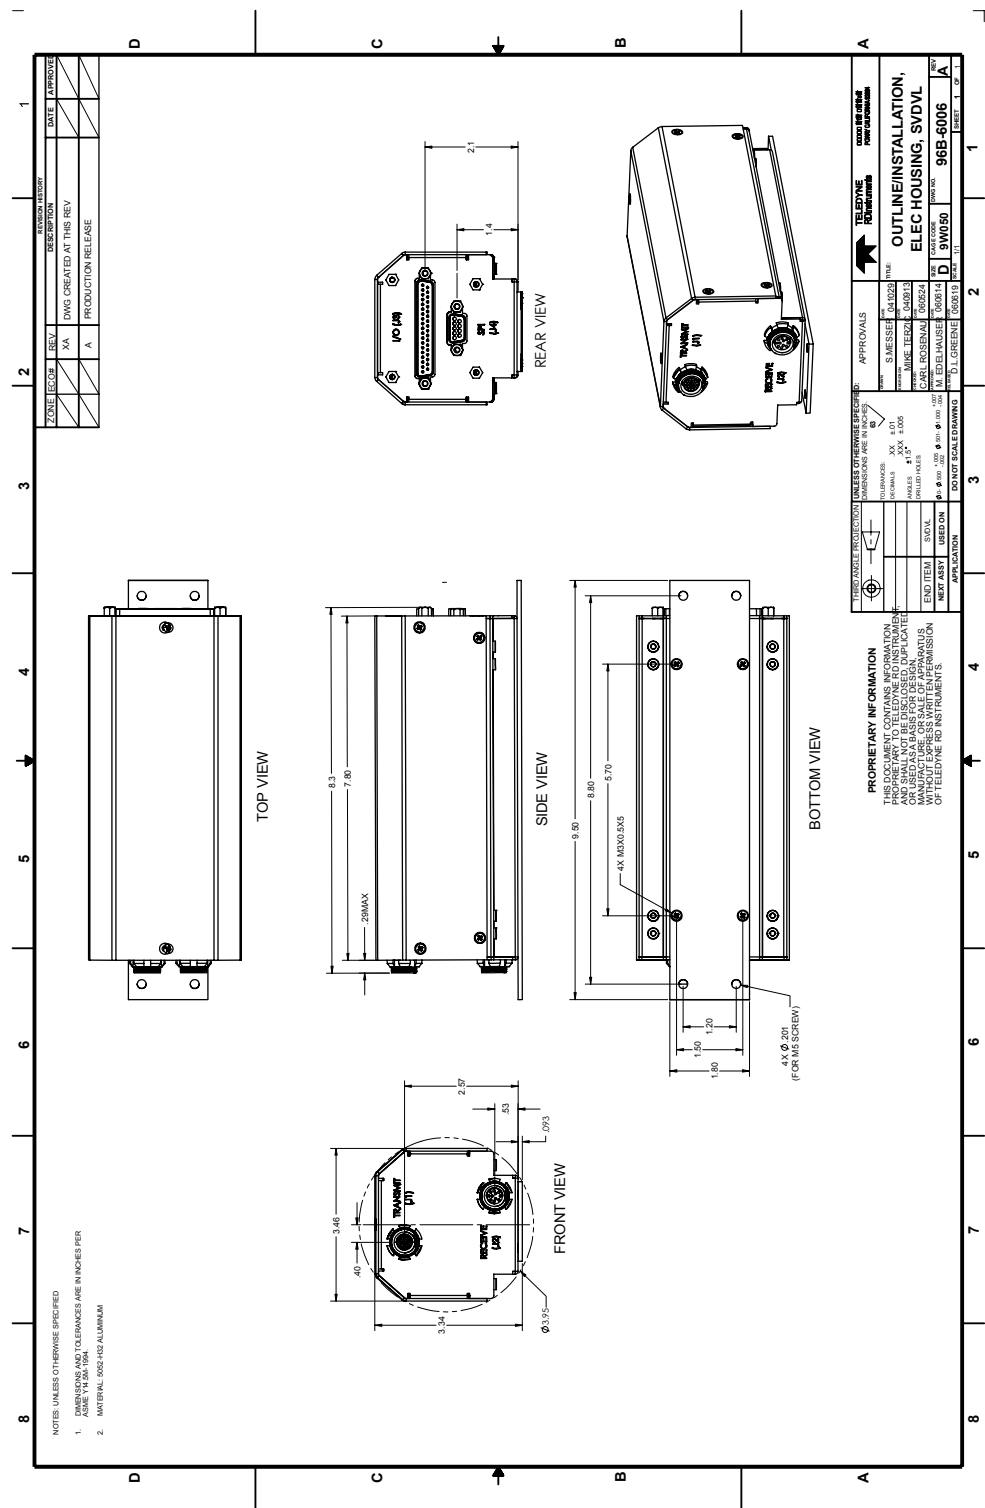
Outline Installation Drawing –ExplorerDVL Electronic Housing
